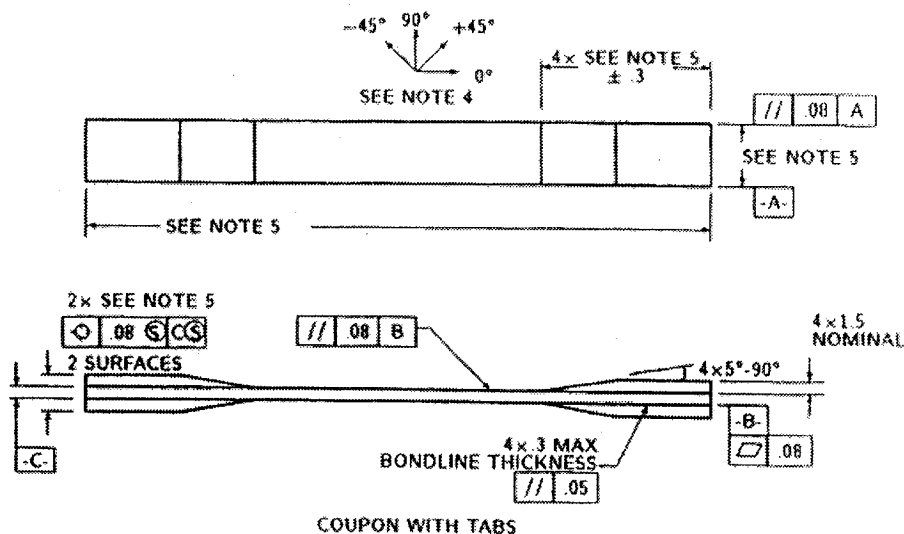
Tension (and fatigue) test specimen drawing [ASTM D3039/D3039M]
